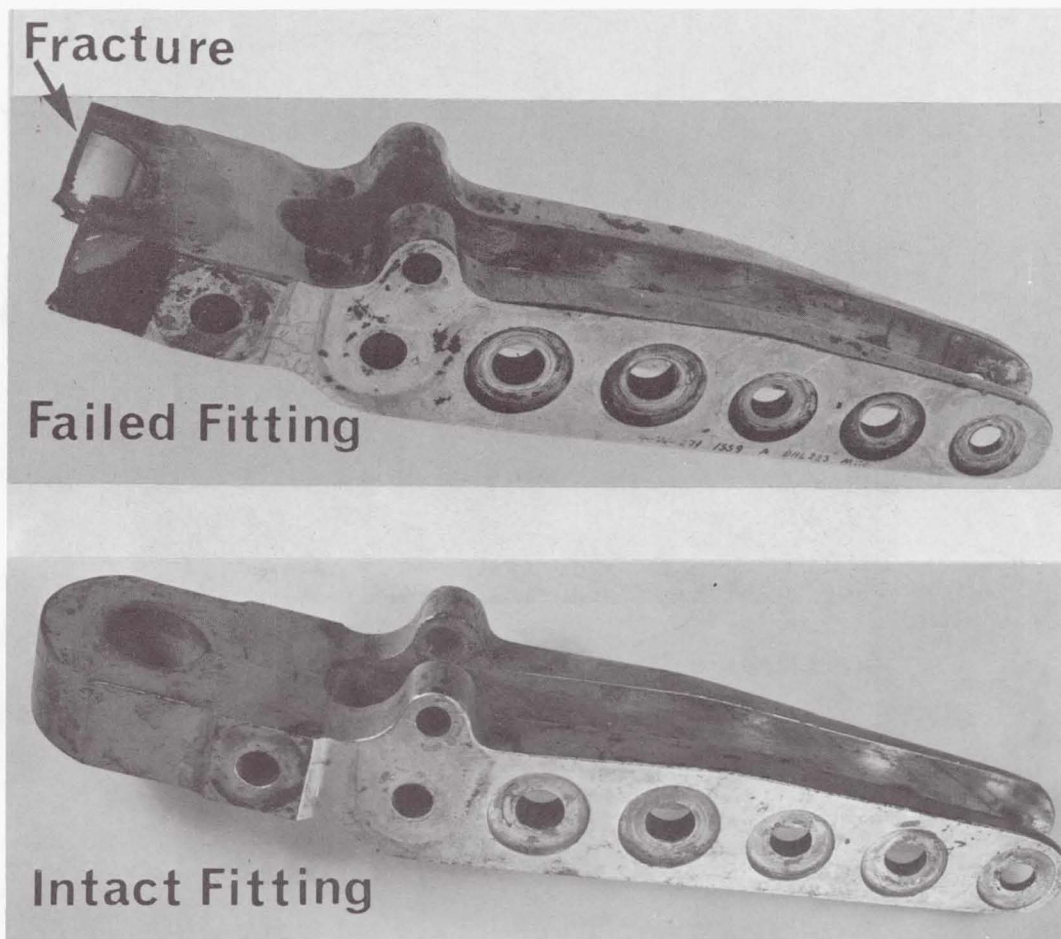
Failed wing attachment fitting with an intact fitting to show the shape of the end where the fracture occurred. X 2/3.
